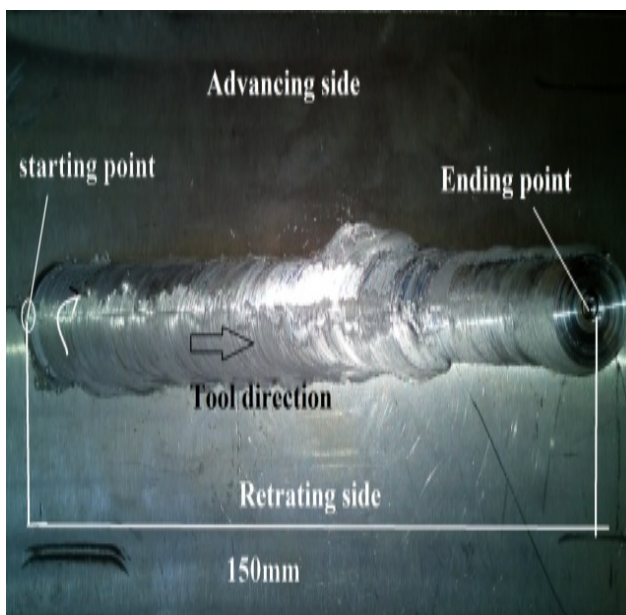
Butt joint welding ferrous and non ferrous metal
